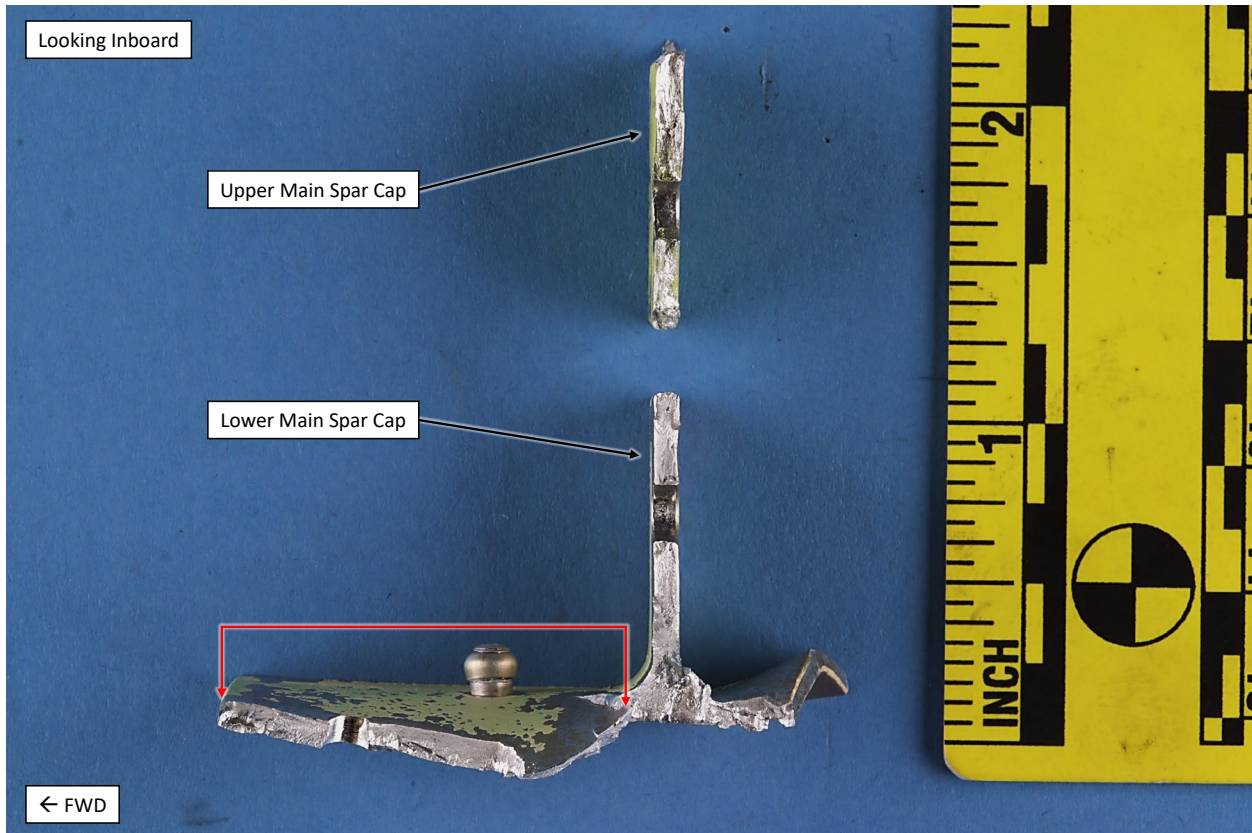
Photograph of the main spar cap fracture surfaces (inboard fracture location) showing a secondary crack along the forward flange of the lower main spar cap indicated by the red bracket. Bending and buckling deformation was observed along the lower flanges. Smearing and contact damage was observed on the upper spar cap fracture surface, around the fastener holes, and along the aft flange fracture surface.
